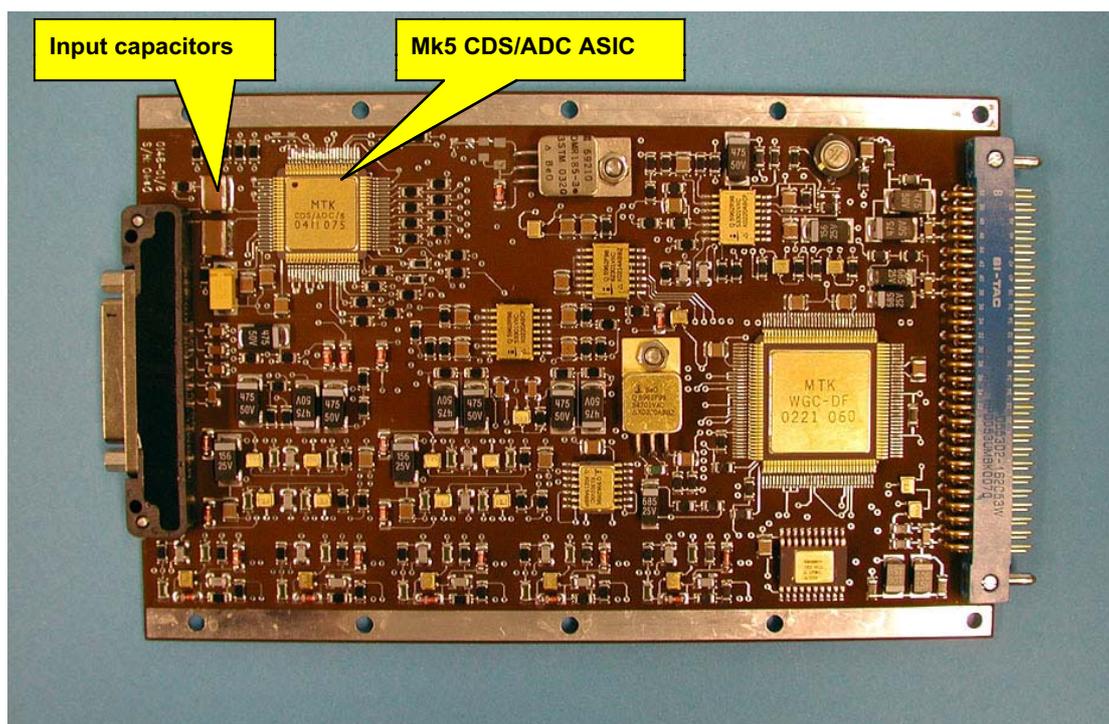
STEREO/SECCHI PCB with MK5 CDS/ADC ASIC
